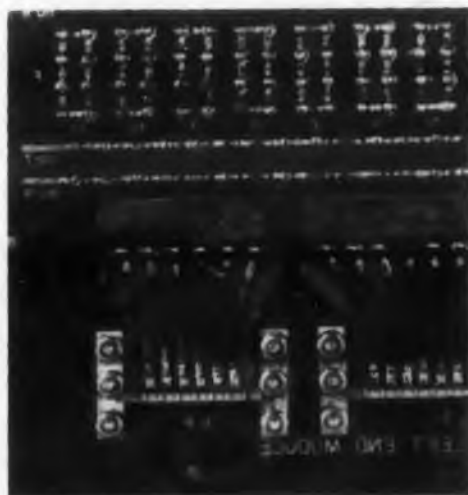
Reverse side of peg board shows how pegs and second row connector terminals are soldered in place.
